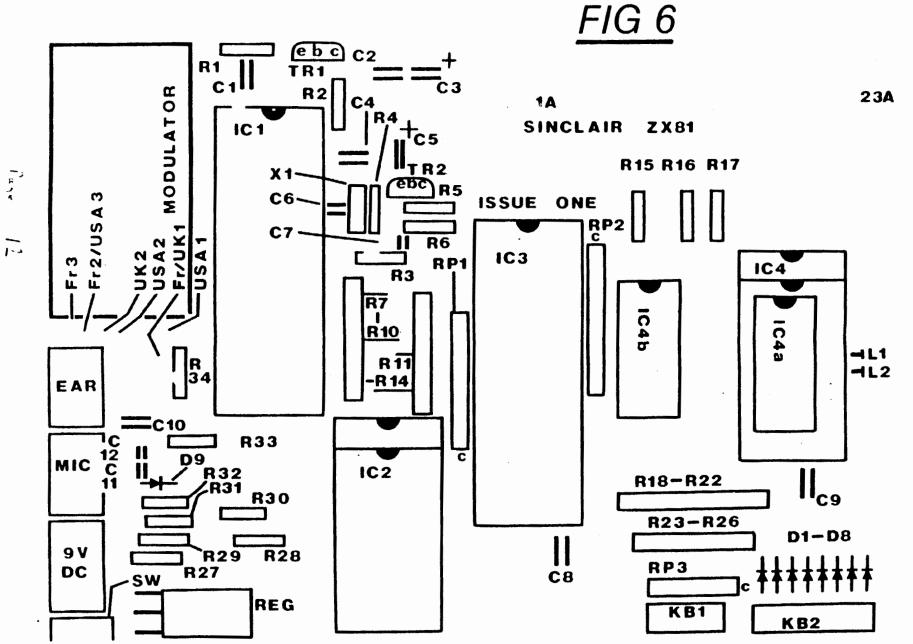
Component side, bare ISSUE 1 2X81 P.C. Board.
